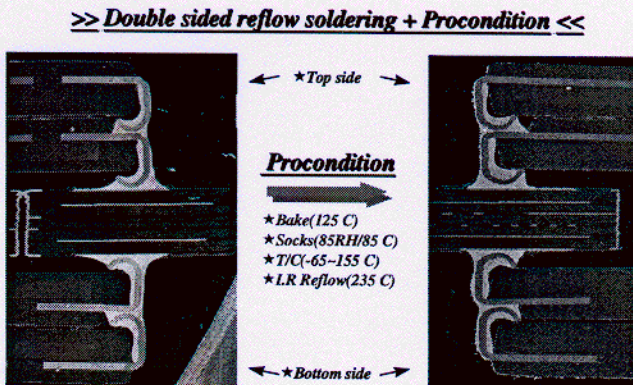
Solder joint of after SMD reflow soldering and precondition test
